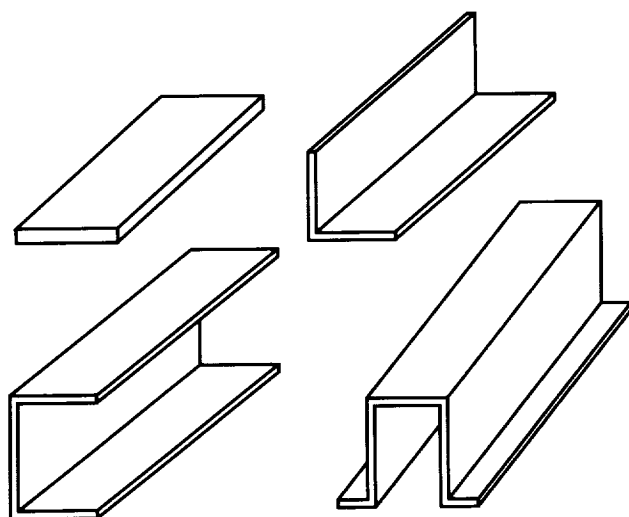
Flat- and open-section beams to be used in phase I.
